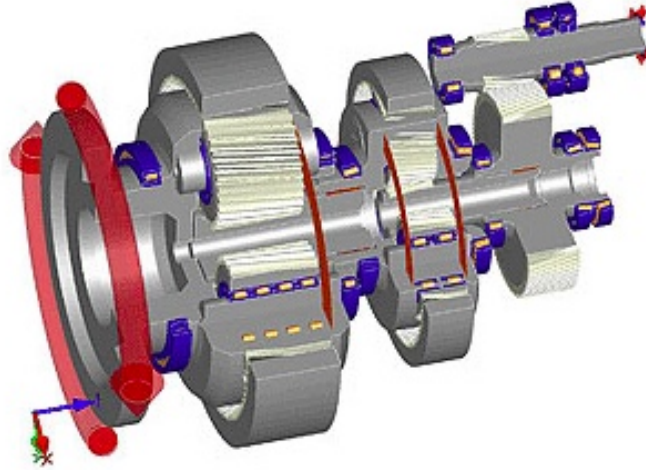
Gearbox. Courtesy of Romax/NKE.
